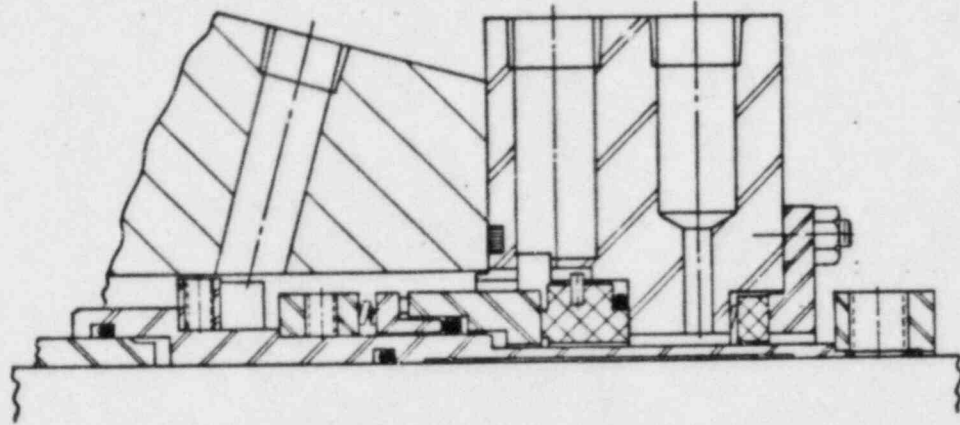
CARTRIDGE TYPE "HPTO" DURA SEAL
